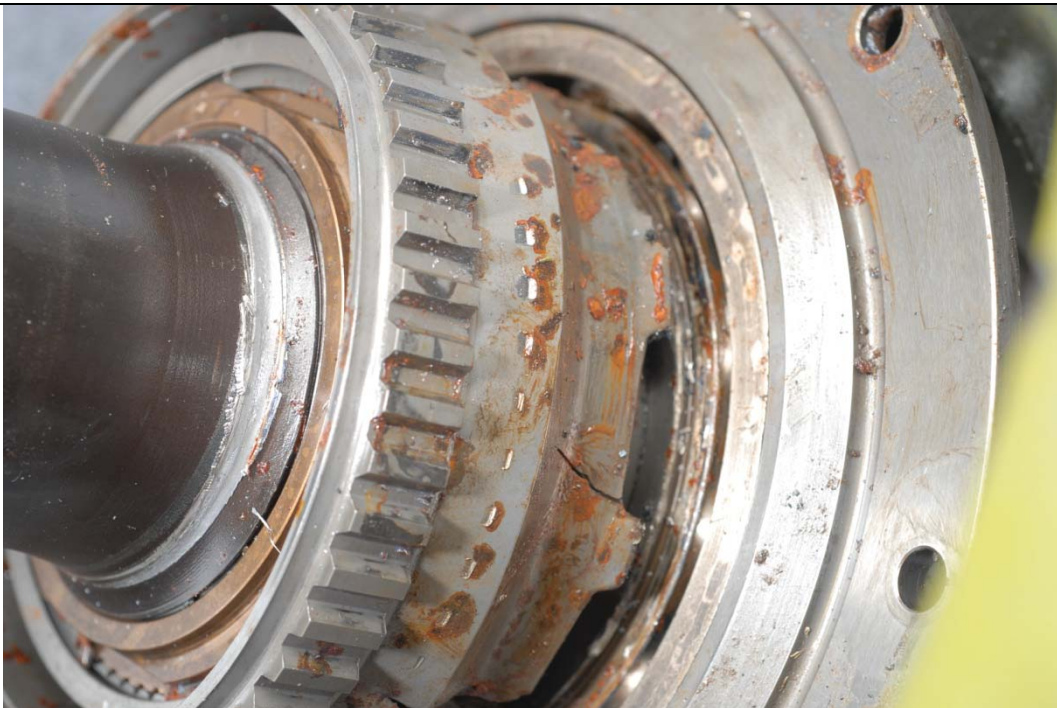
P-79297C, Propeller Shaft Lock Nut
